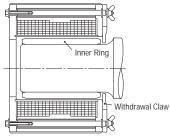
Removal of Inner Ring Using Induction Heater
